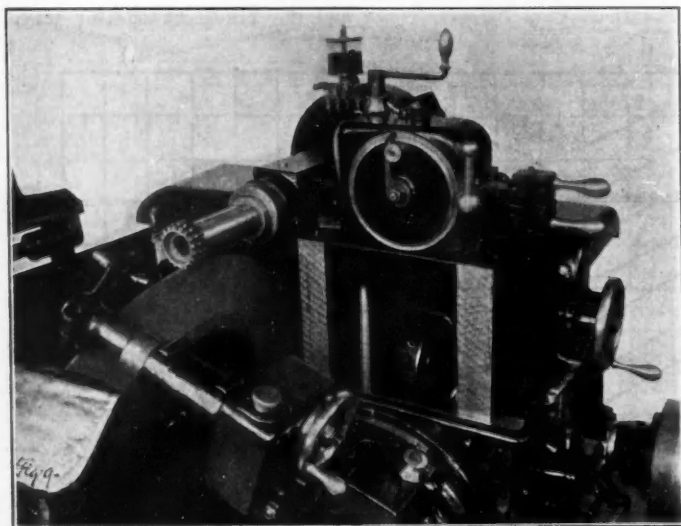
GRINDING THE DRIVING SIDE OF AN 18-TOOTH STEM GEAR WITH THE WHEEL-HEAD SWIVELED 20 DEG. TO THE RIGHT
